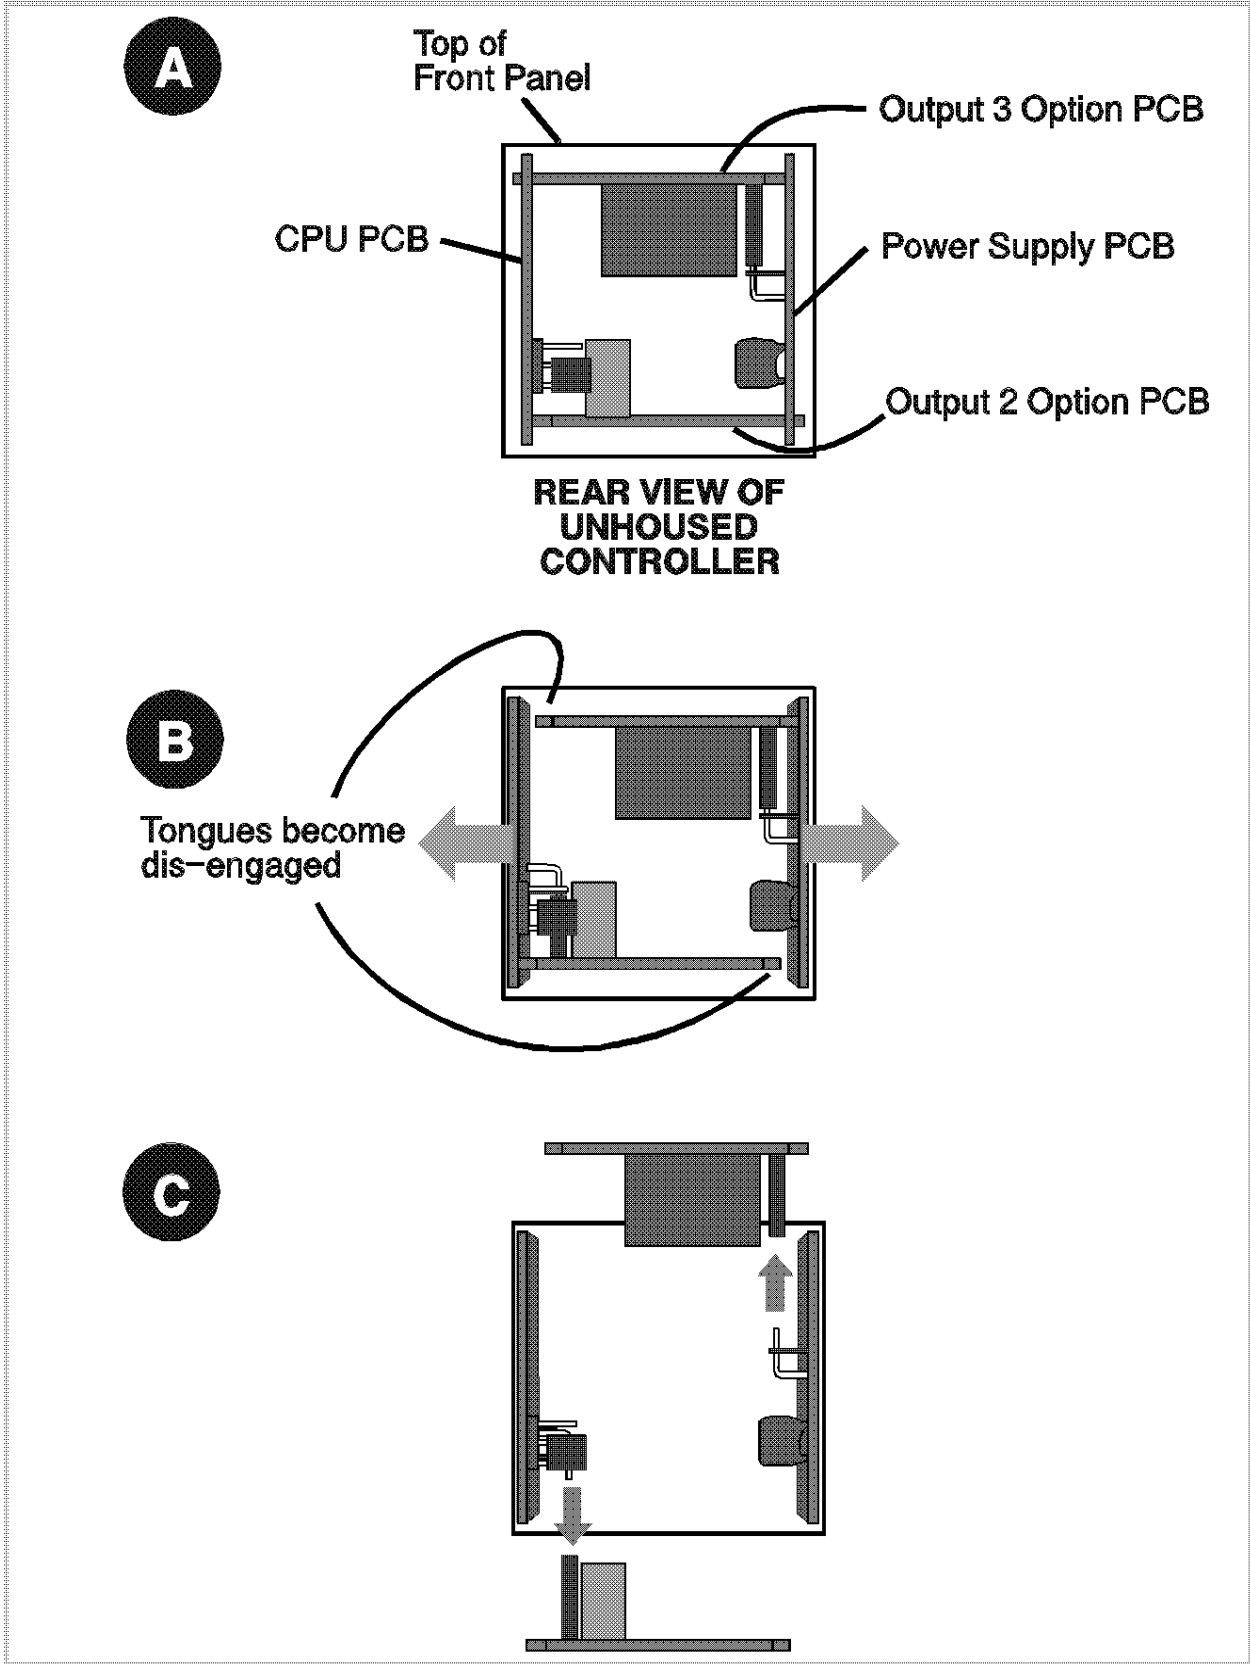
Removing the Output 2/Output 3 Option PCBs
